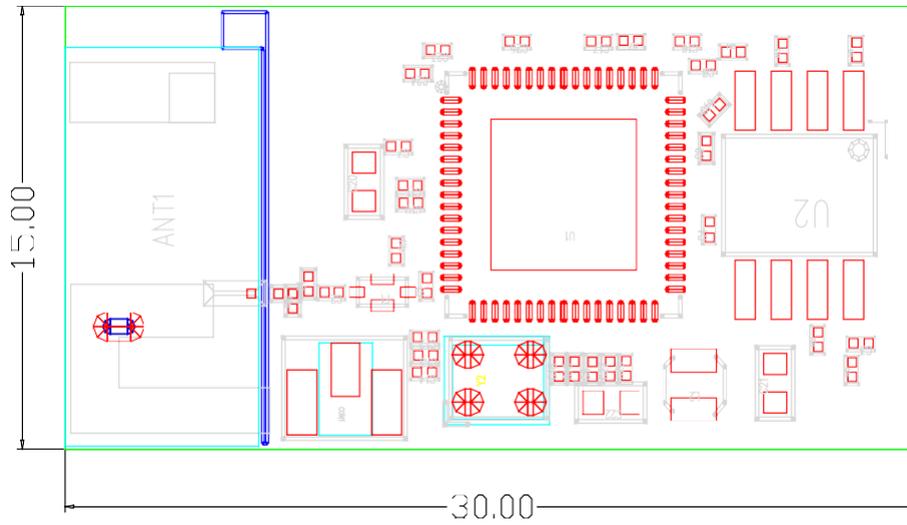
GTI_MW300L / MW320L module mechanical dimension – Top view (Unit: mm)
